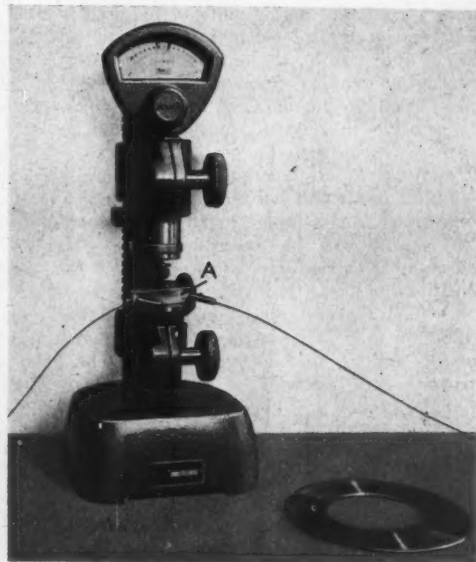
This Mercer Abramson comparator, used for checking the thickness of strip stock, can be read directly to 0.0005 mm. (0.00002 in.)
